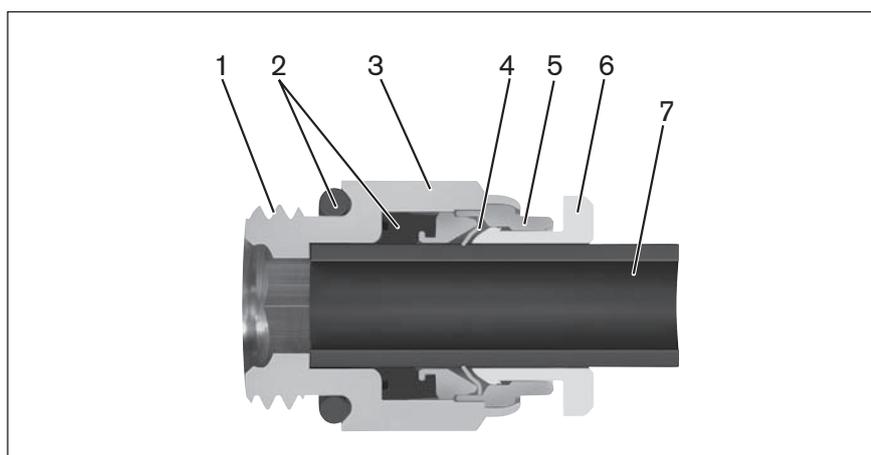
Push-in fitting structure, taking the QR1 series as example
